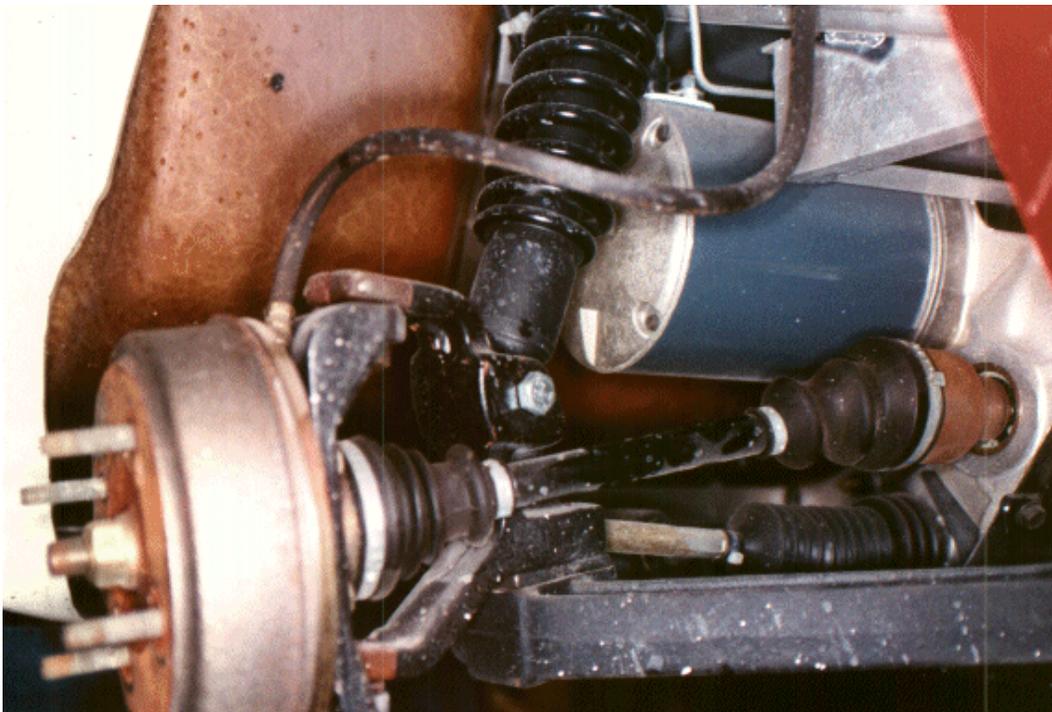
Details of Front Suspension, Drive Train, and Steering Linkage
